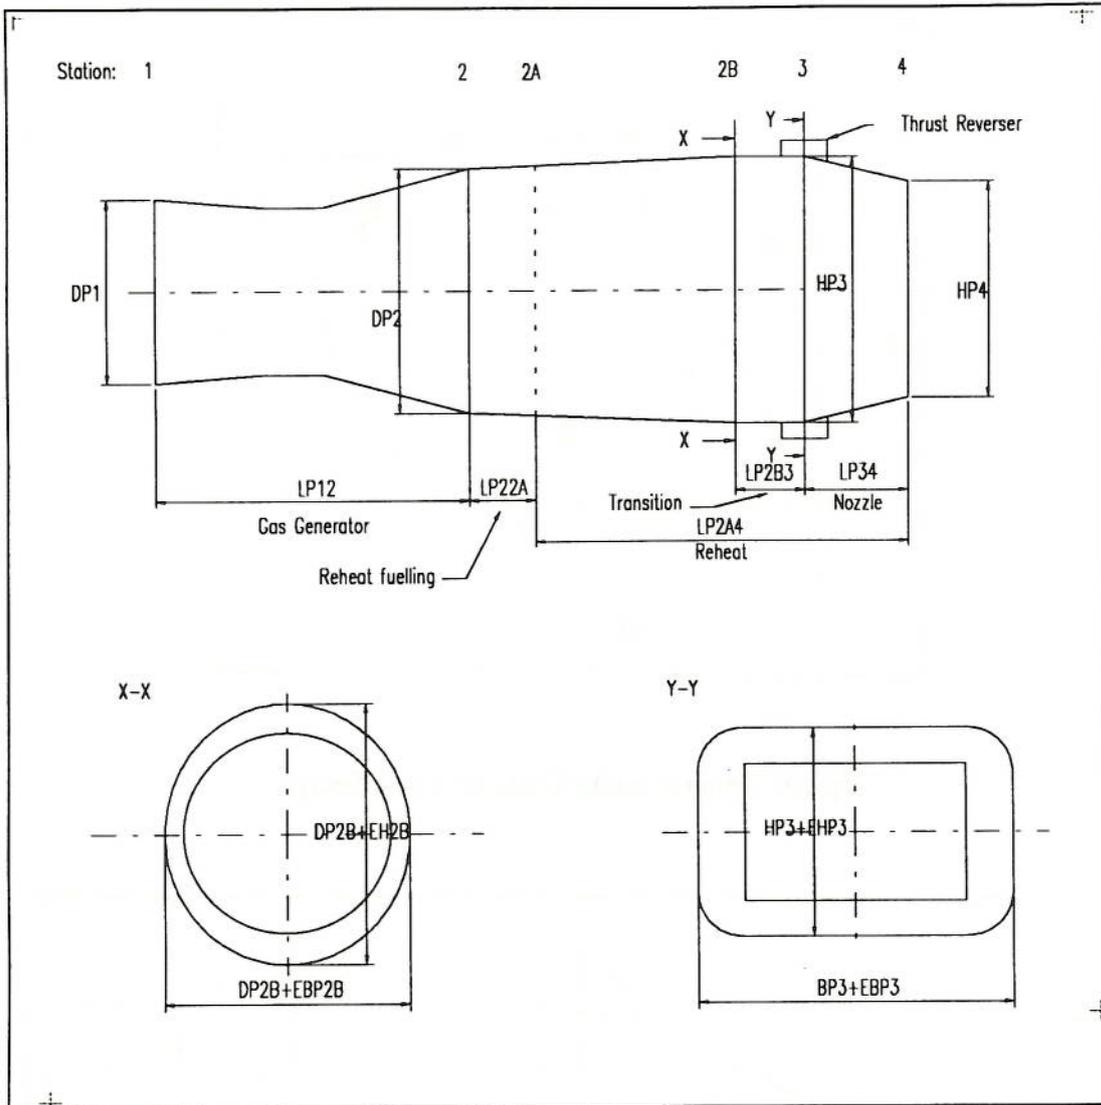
Engine Geometry with Two-Dimensional Nozzles
